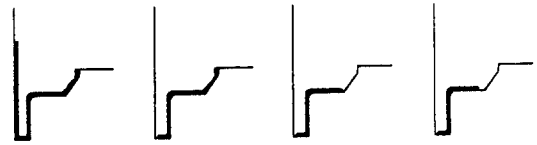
Display of contacting surface (hatched area) between the lower die and workpiece
